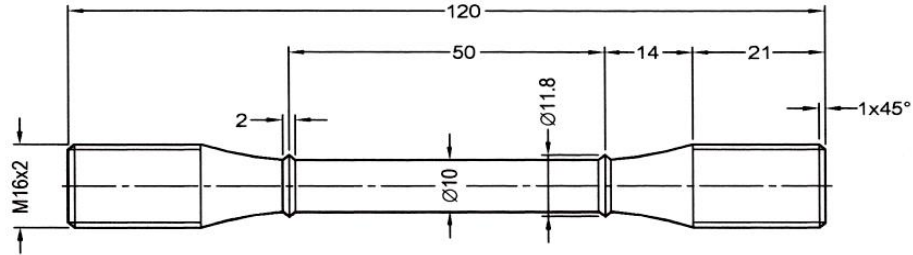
A schematic of the tensile creep test specimen (dimensions are in mm).
